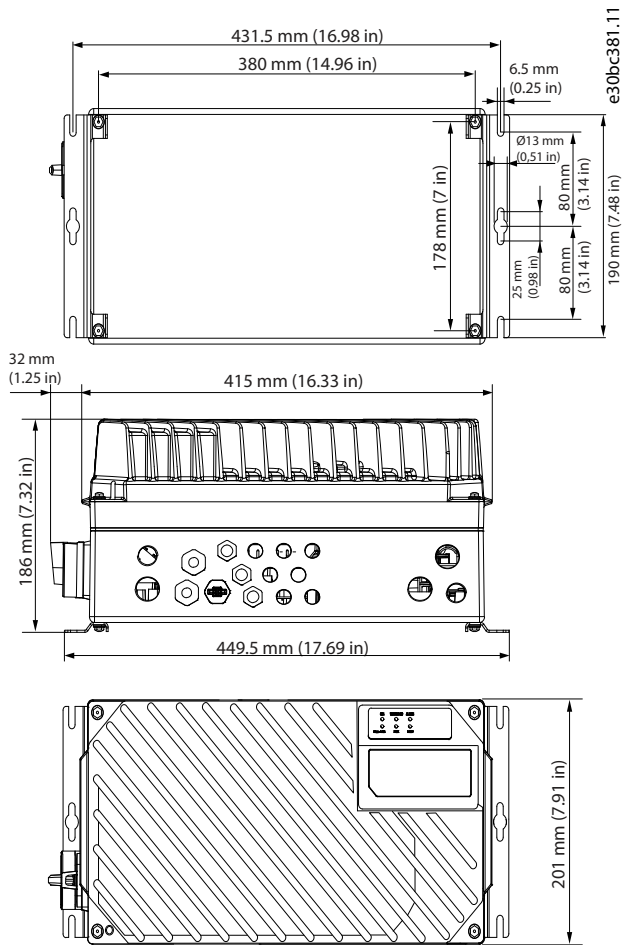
Cable Entries and Hole Sizes (Large Unit)
